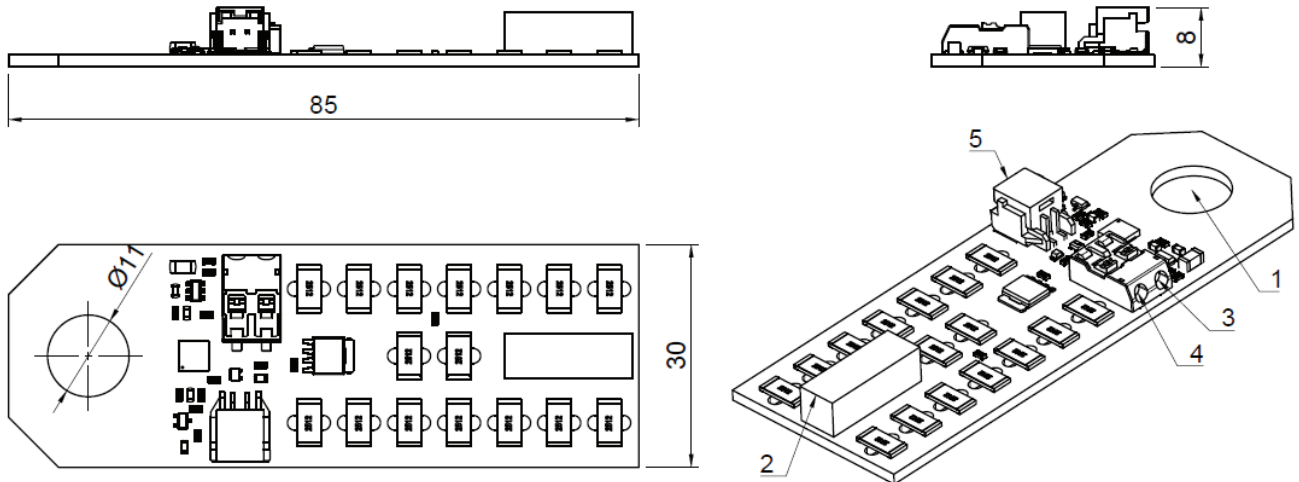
EMUS G1 Cell Module 3A (CM071A) mechanical drawing. All dimensions in millimeters
